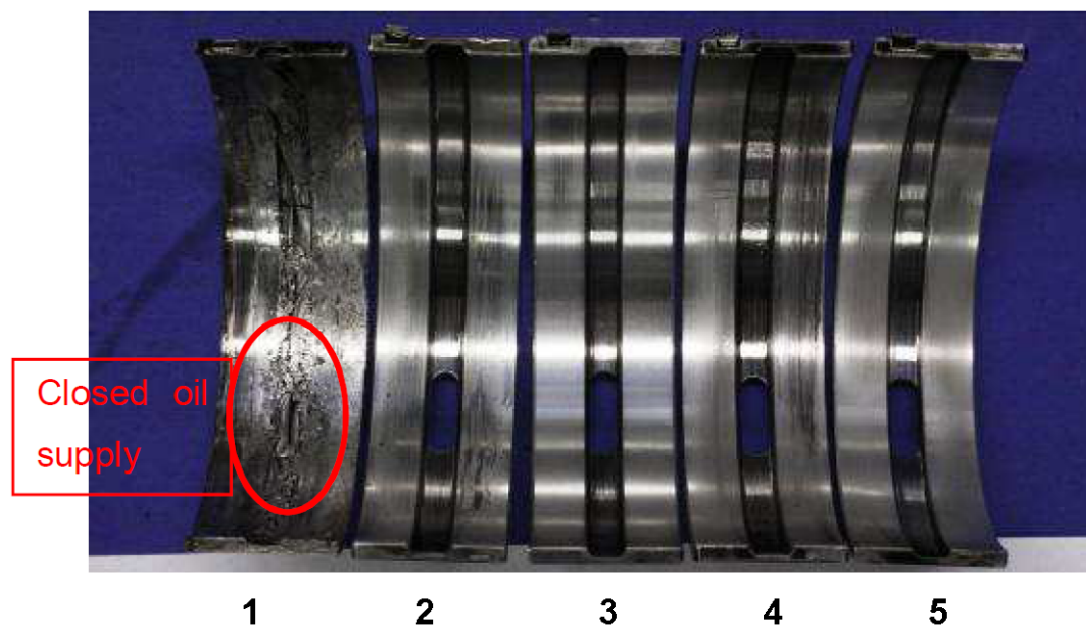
Upper crankshaft bearings (1 is the position closest to the belt pulley)
